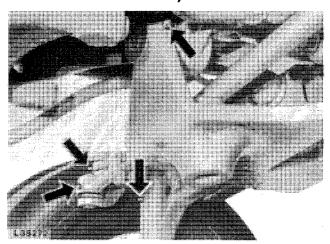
Throw-Out Bearing Grease Fitting (Tractor with SOUND-GARD Body Shown)
